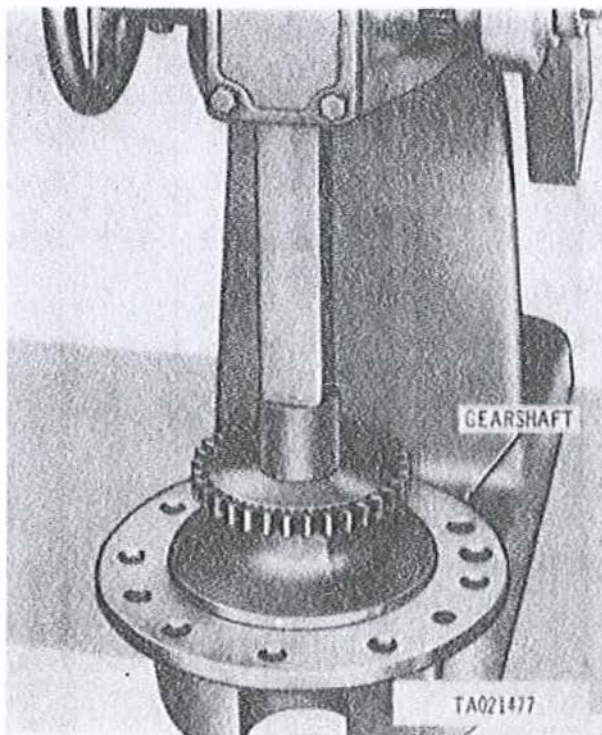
Pressing bushing-type bearing from transmission drive gearshaft, model AVDS-1790-2C and AVDS-1790-2D engines.
